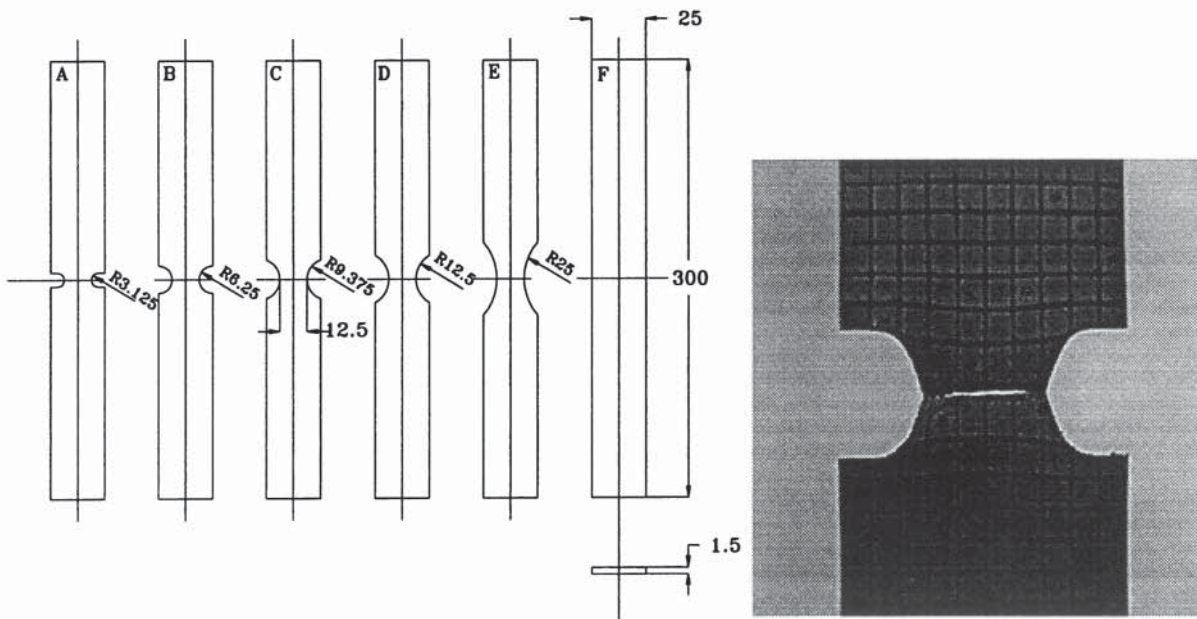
Left: Example of specimen geometries which can give the strain paths for the left-hand side of a FLD. Right: Specimen type A after fracture. The illustrated fracture is very typical for tensile specimens with cuttings: Fracture initiates at the symmetry point and grows towards the edges.
